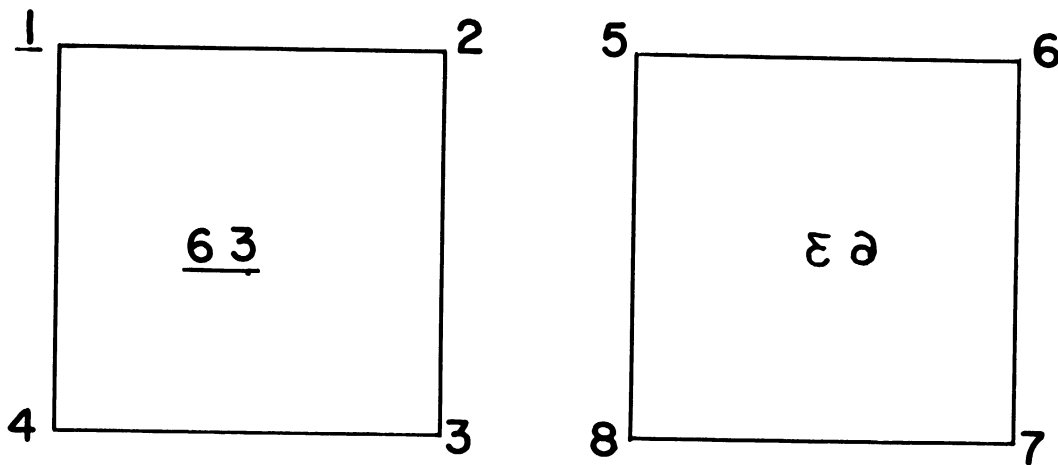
Method of identifying cutting edges of indexable carbide tool bits.
